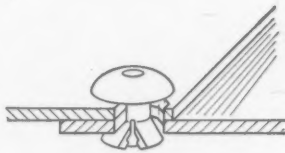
Expanded prongs force sheets or parts together, hold them tightly in compression. No metal is removed, no grinding or finishing is required.
